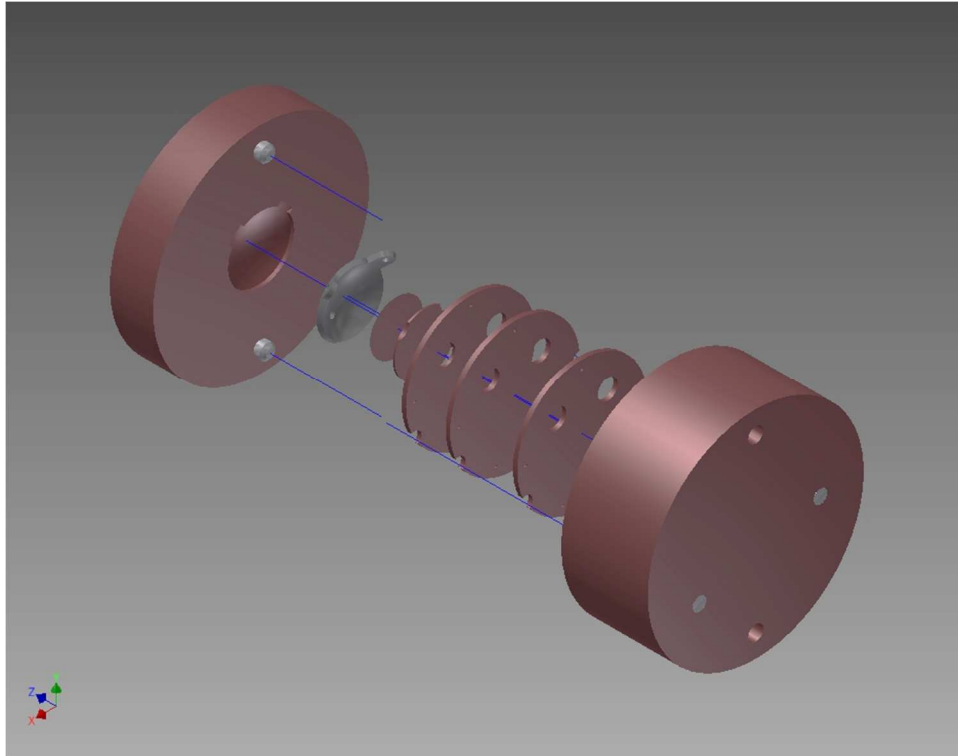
Assembly drawing of the “eye” phantom with a ^{106}Ru eye plaque.
